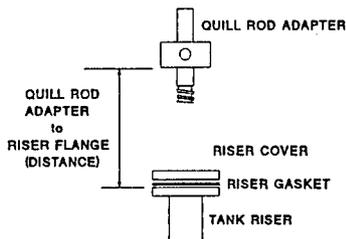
Quill Rod Adapter to Riser Flange Distance.
